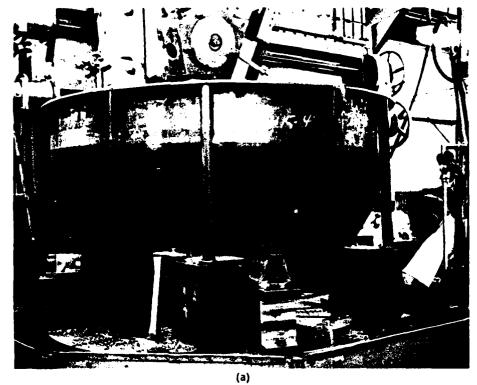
Male mold with inner surfener rings tacked in place for welding.
